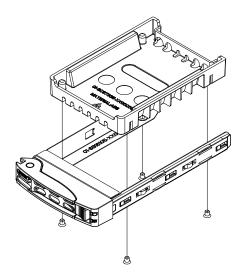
Removing a Dummy Drive from the Drive Carrier
